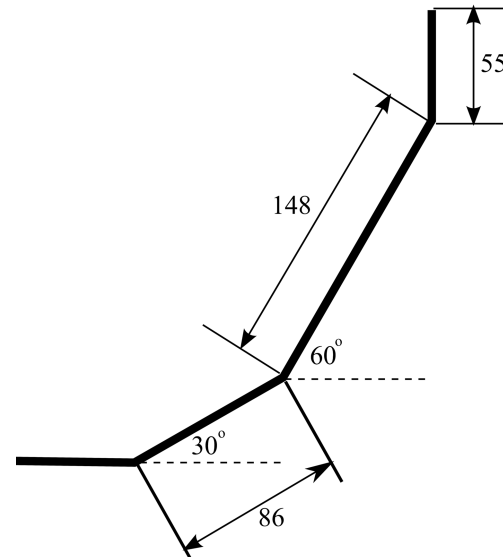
Selected Flow Guide Geometry Dimensions [mm]
